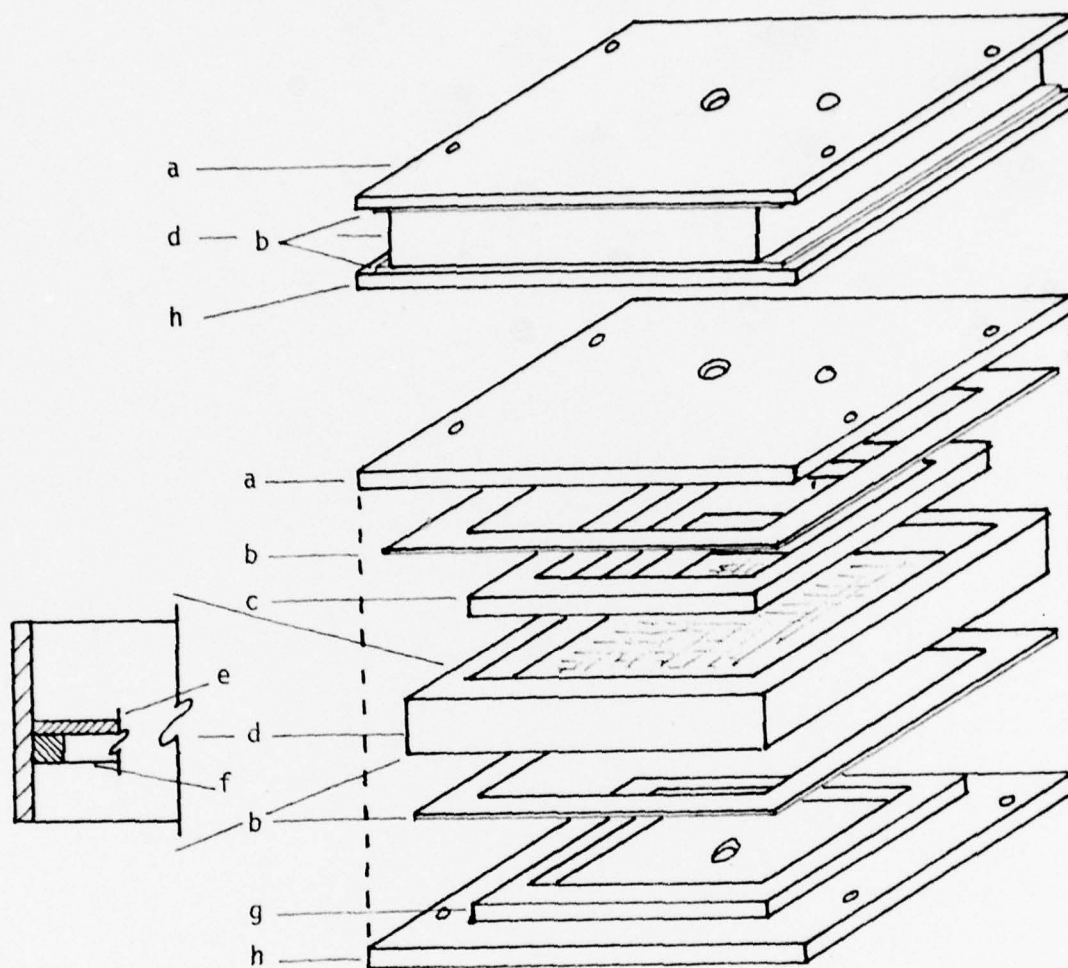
A Diagram of the Large Volume Filter Chamber: a, top plate; b, silicone rubber gaskets; c, filter retaining ring; d, filter support section; e, screen; f, screen support flange; g, bottom plate covering flange; h, bottom plate.
